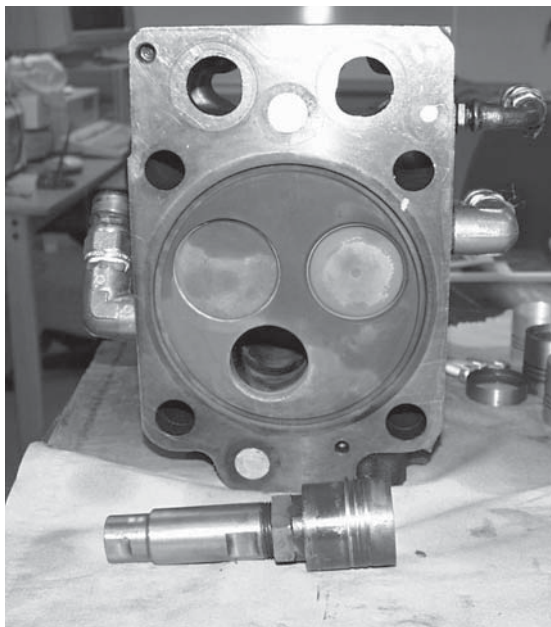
The modified cylinder head and the secondary piston unit. Note the lack of spark plug and fuel injector. The pressure transducer was placed in the secondary piston.
